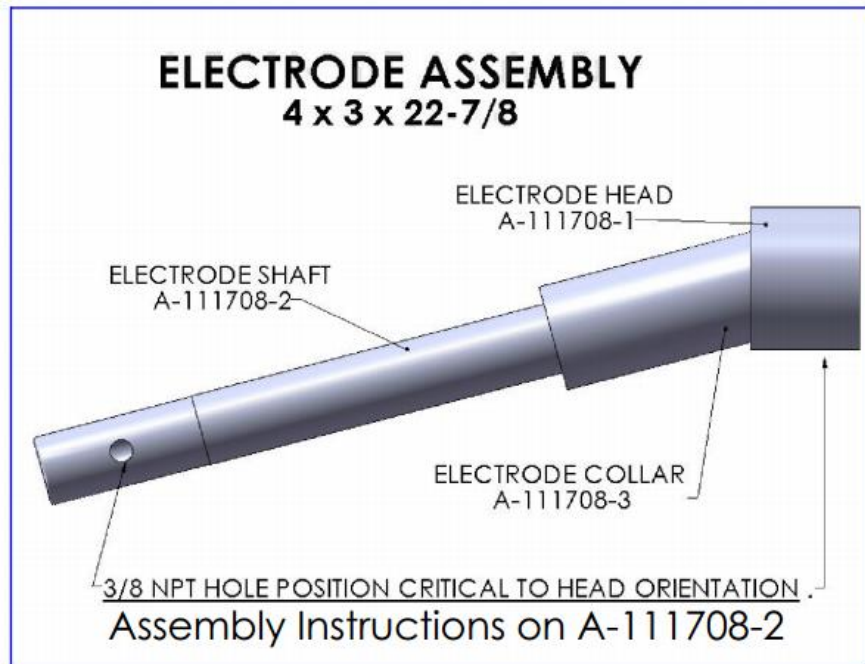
The schematic sketch showing the electrode assembly before the failure.
